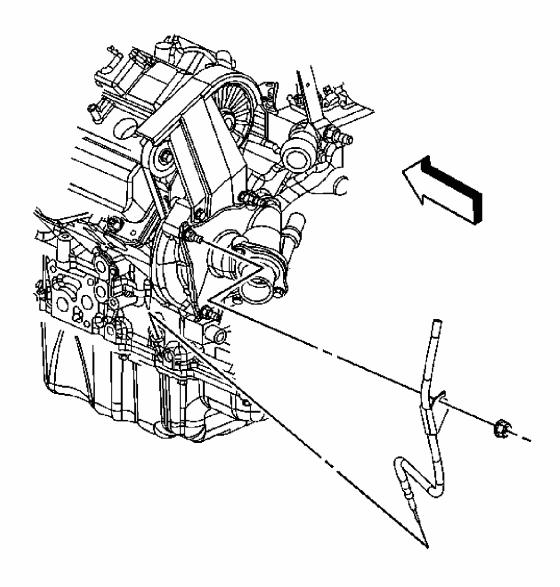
Idebtifying Oil Level Indicator Tube Courtesy of GENERAL MOTORS CORP.
